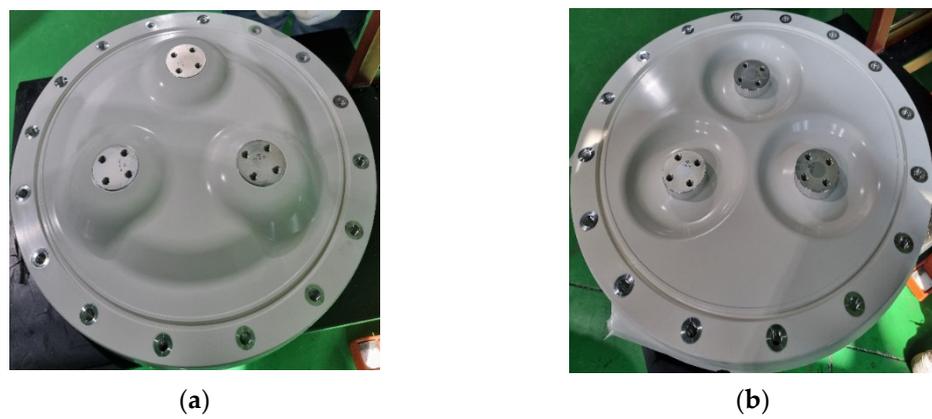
Manufactured GIS spacer, front side (a); and rear side (b).
